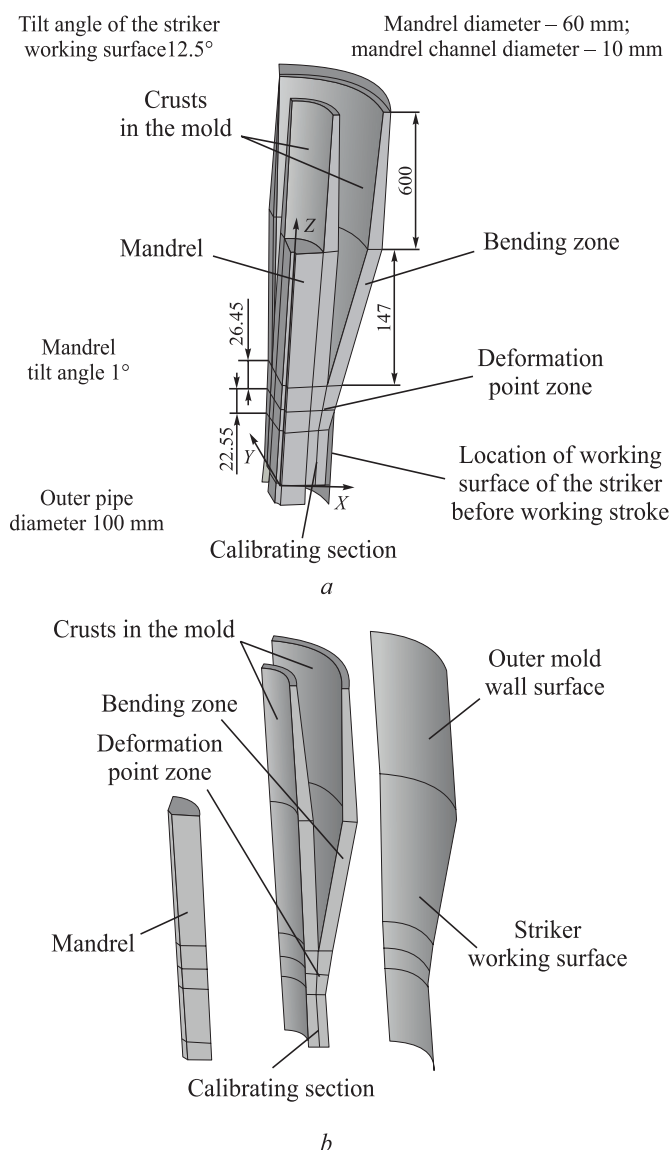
Geometry of the mandrel, crusts in the mold, bending zone, roll pass, and striker:
